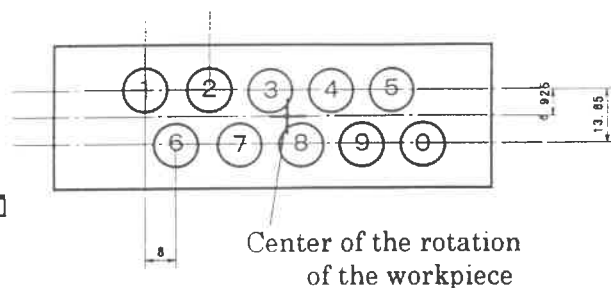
Arrangement of the tools in the prototype machine and its covering area
